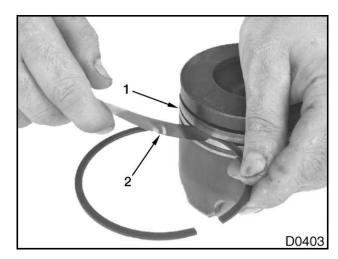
Second and third ring groove clearance check (intermediate ring shown)
